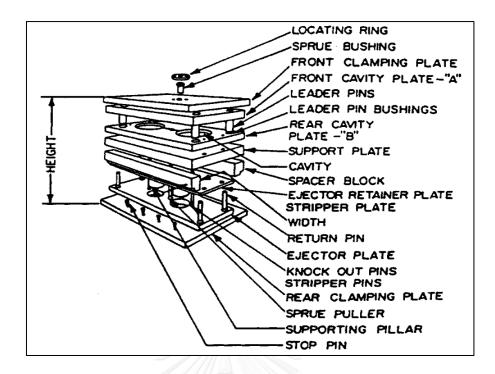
Exploded view of mould base (Rosato et al., 2000)
